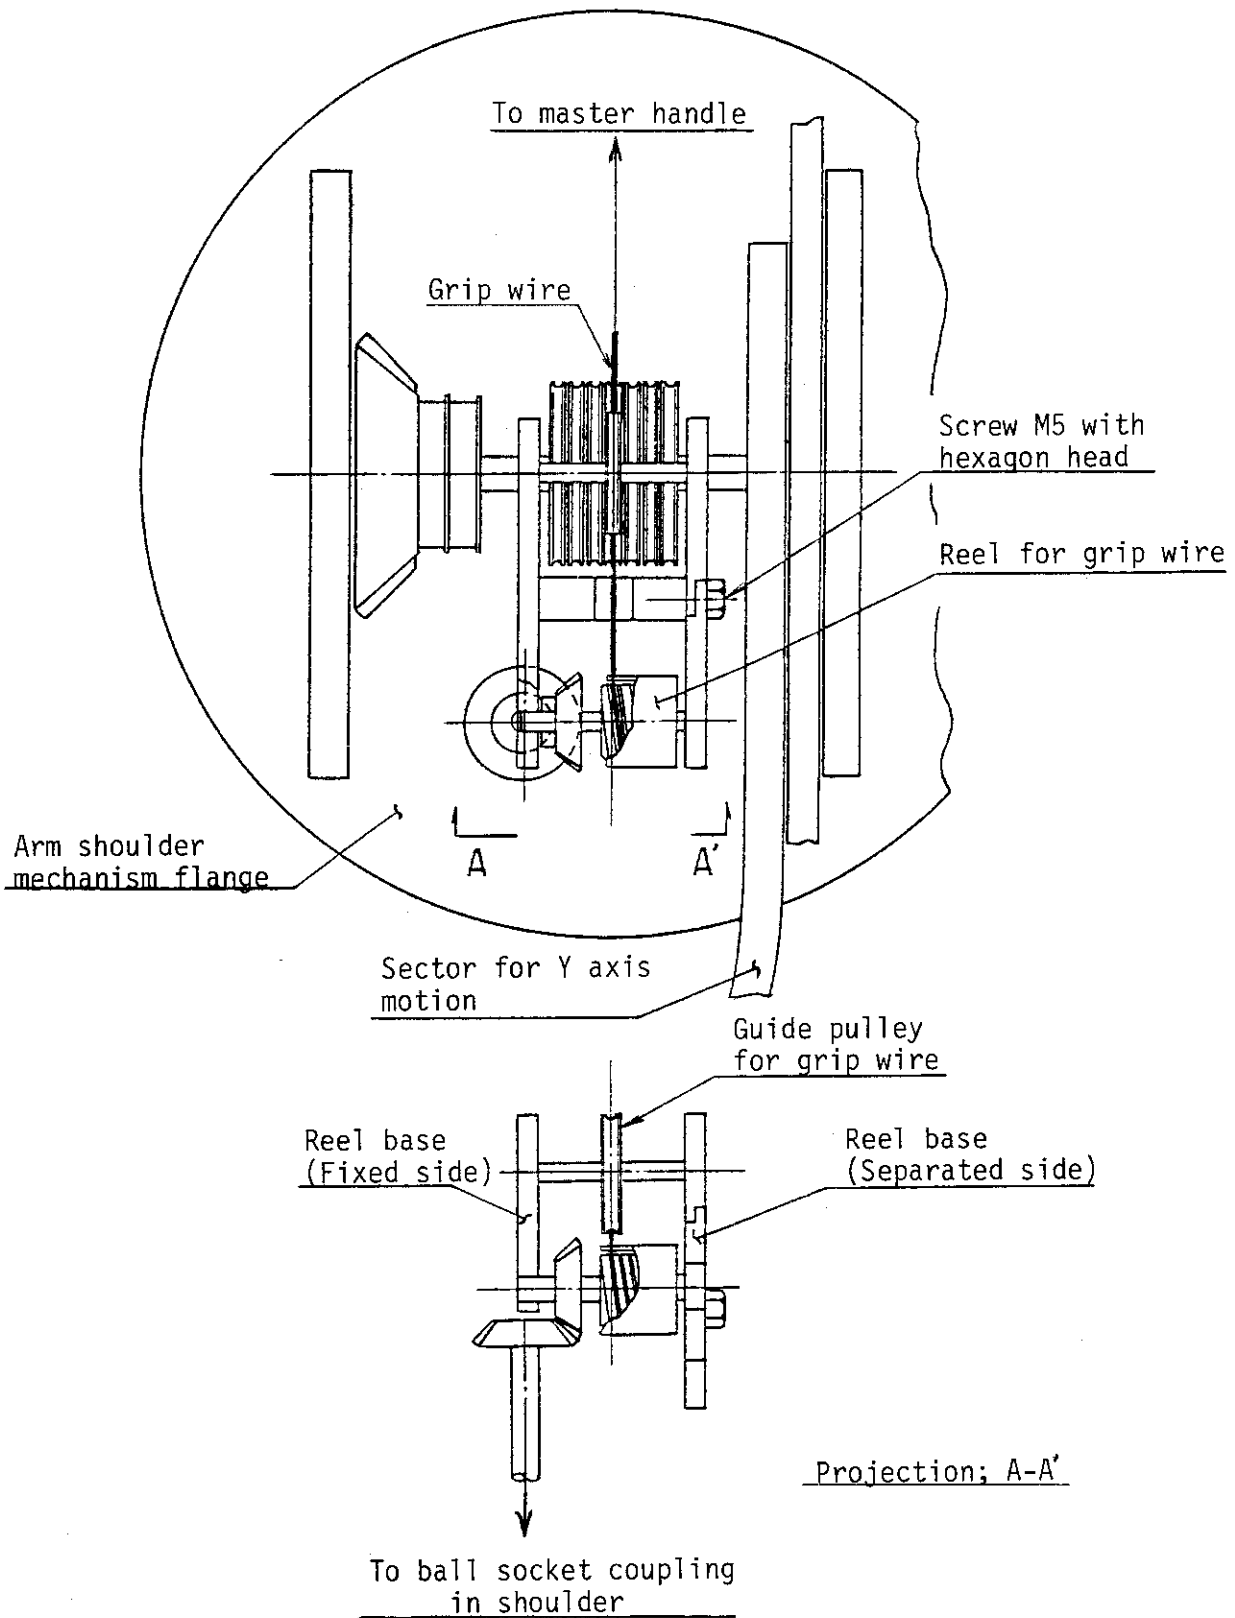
Detail of handle grip motion transmission mechanism of master arm shoulder
